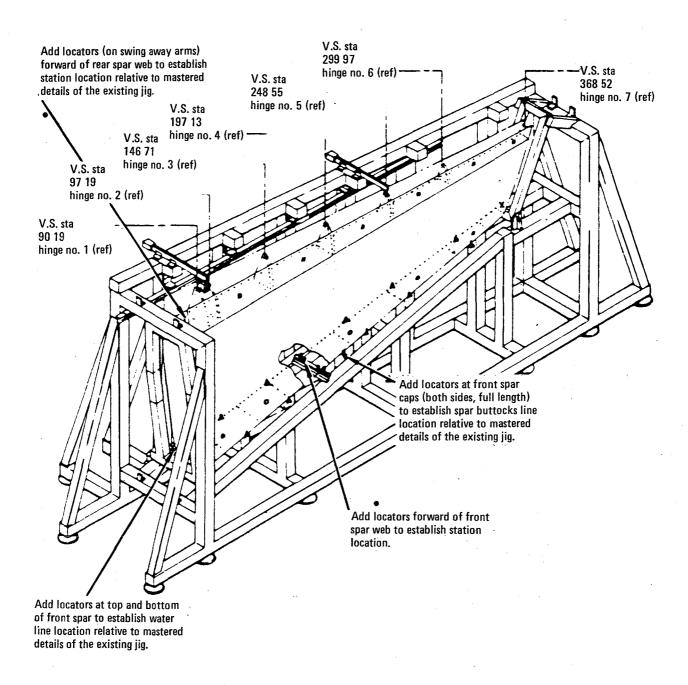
Alterations to L-1011 fin assembly tool for ACVF.
